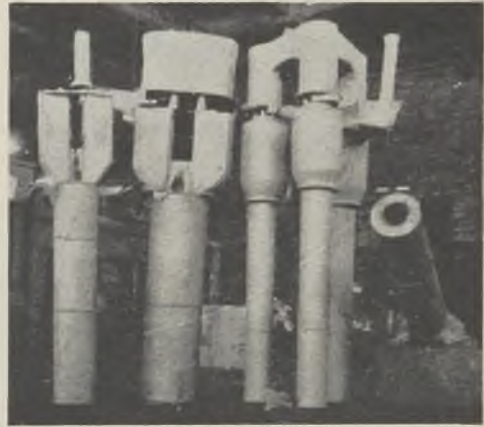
SOLID AND CORED BUSHINGS IN MONEL METAL.
